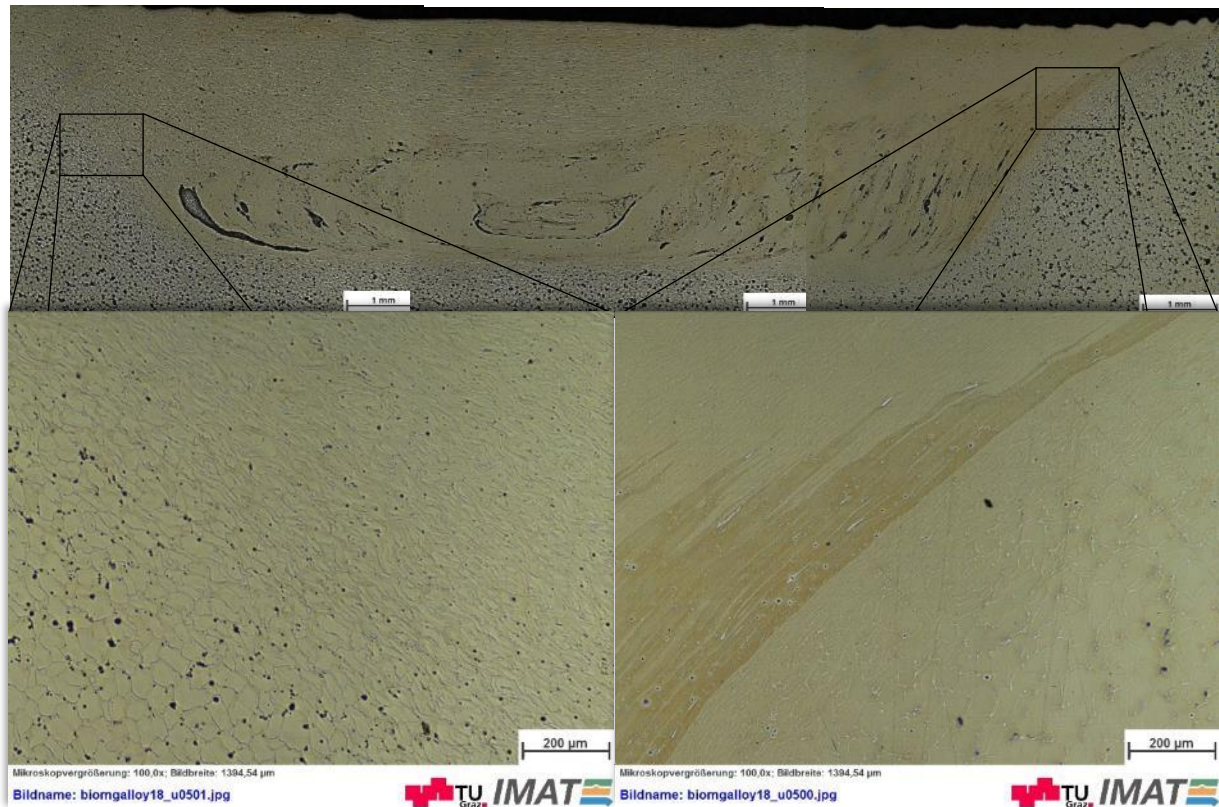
Friction stir processed ZK40. Cross section through weld 3 at position II. Detail of the advancing (left) and the retreating side (right).
